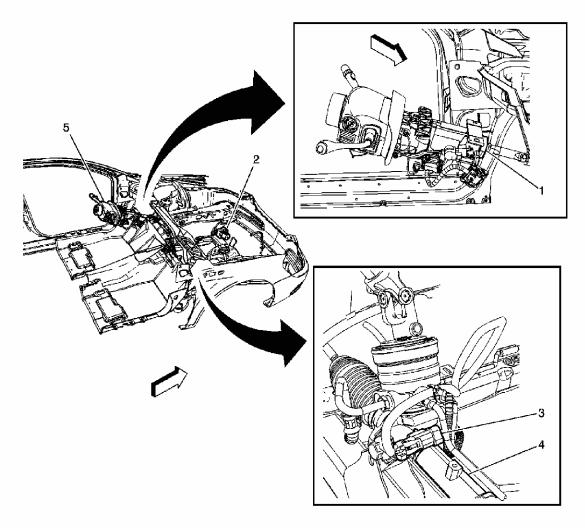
Identifying Power Steering Components Courtesy of GENERAL MOTORS CORP.
